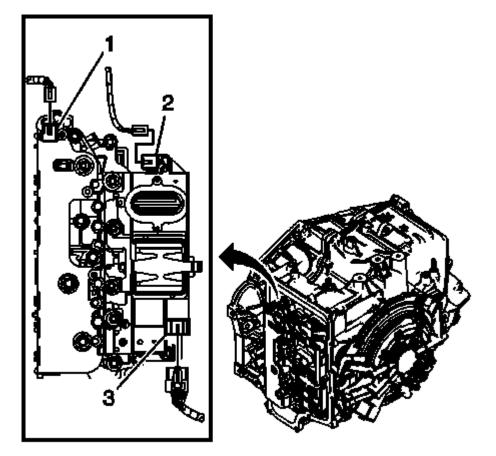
Identifying Electrical Connectors Courtesy of GENERAL MOTORS COMPANY
